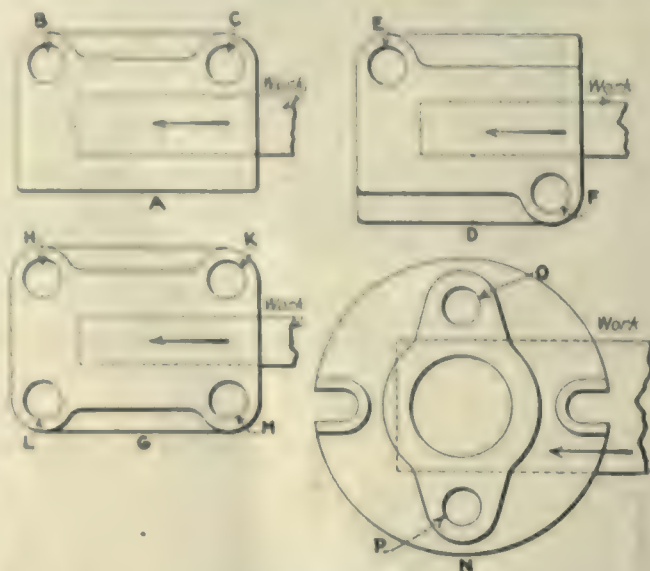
STYLES OF DIE SHOES, SHOWING POSITION OF GUIDE PINS
